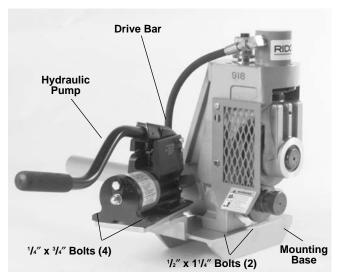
918 Roll Groover on 535 Threading Machine Mounting Base
